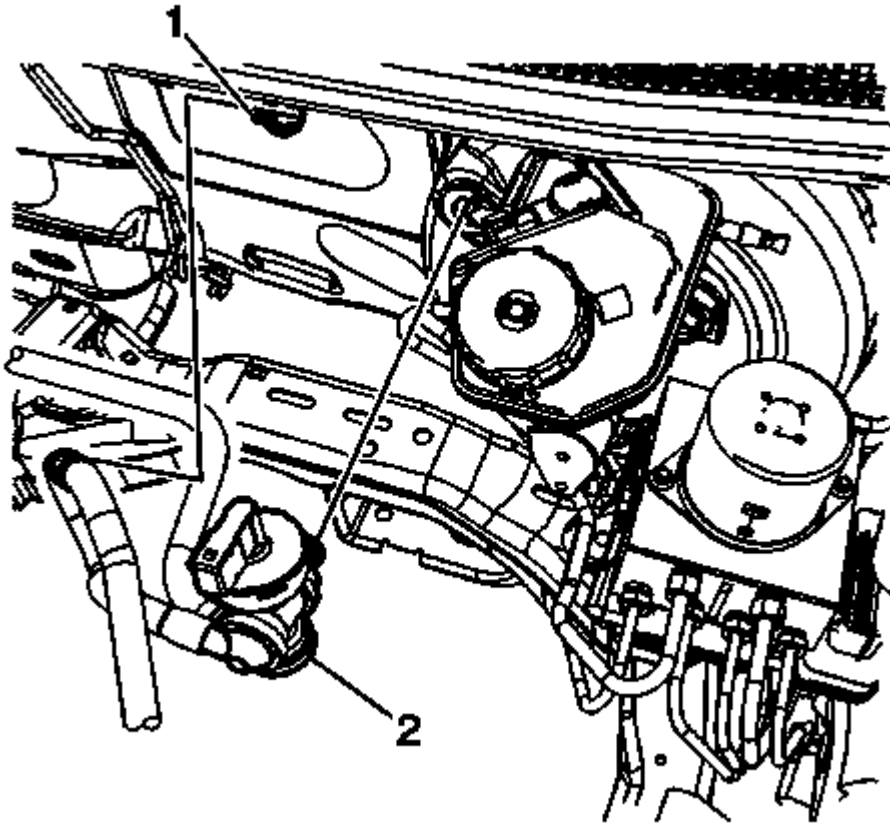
Power Brake Booster Vacuum Rear Pipe Retainer & Sensor
